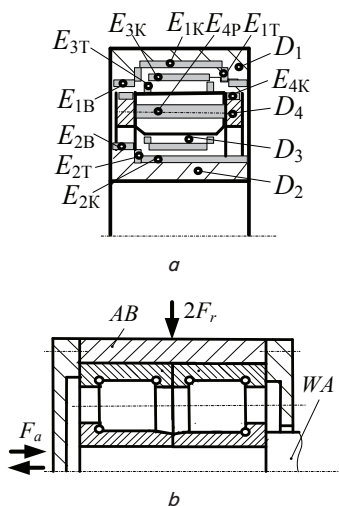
The basic roller bearing design: *a* – structure; *b* – bearings in axleboxes (WA – wheel axle, AB – axlebox body;  $F_r$ ,  $F_a$  – radial and axial load)
